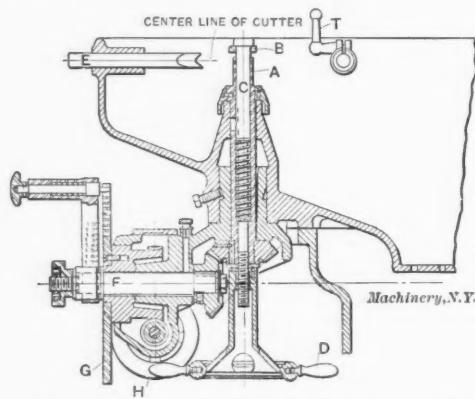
The Work Spindle and its Clamping and Indexing Mechanism.
